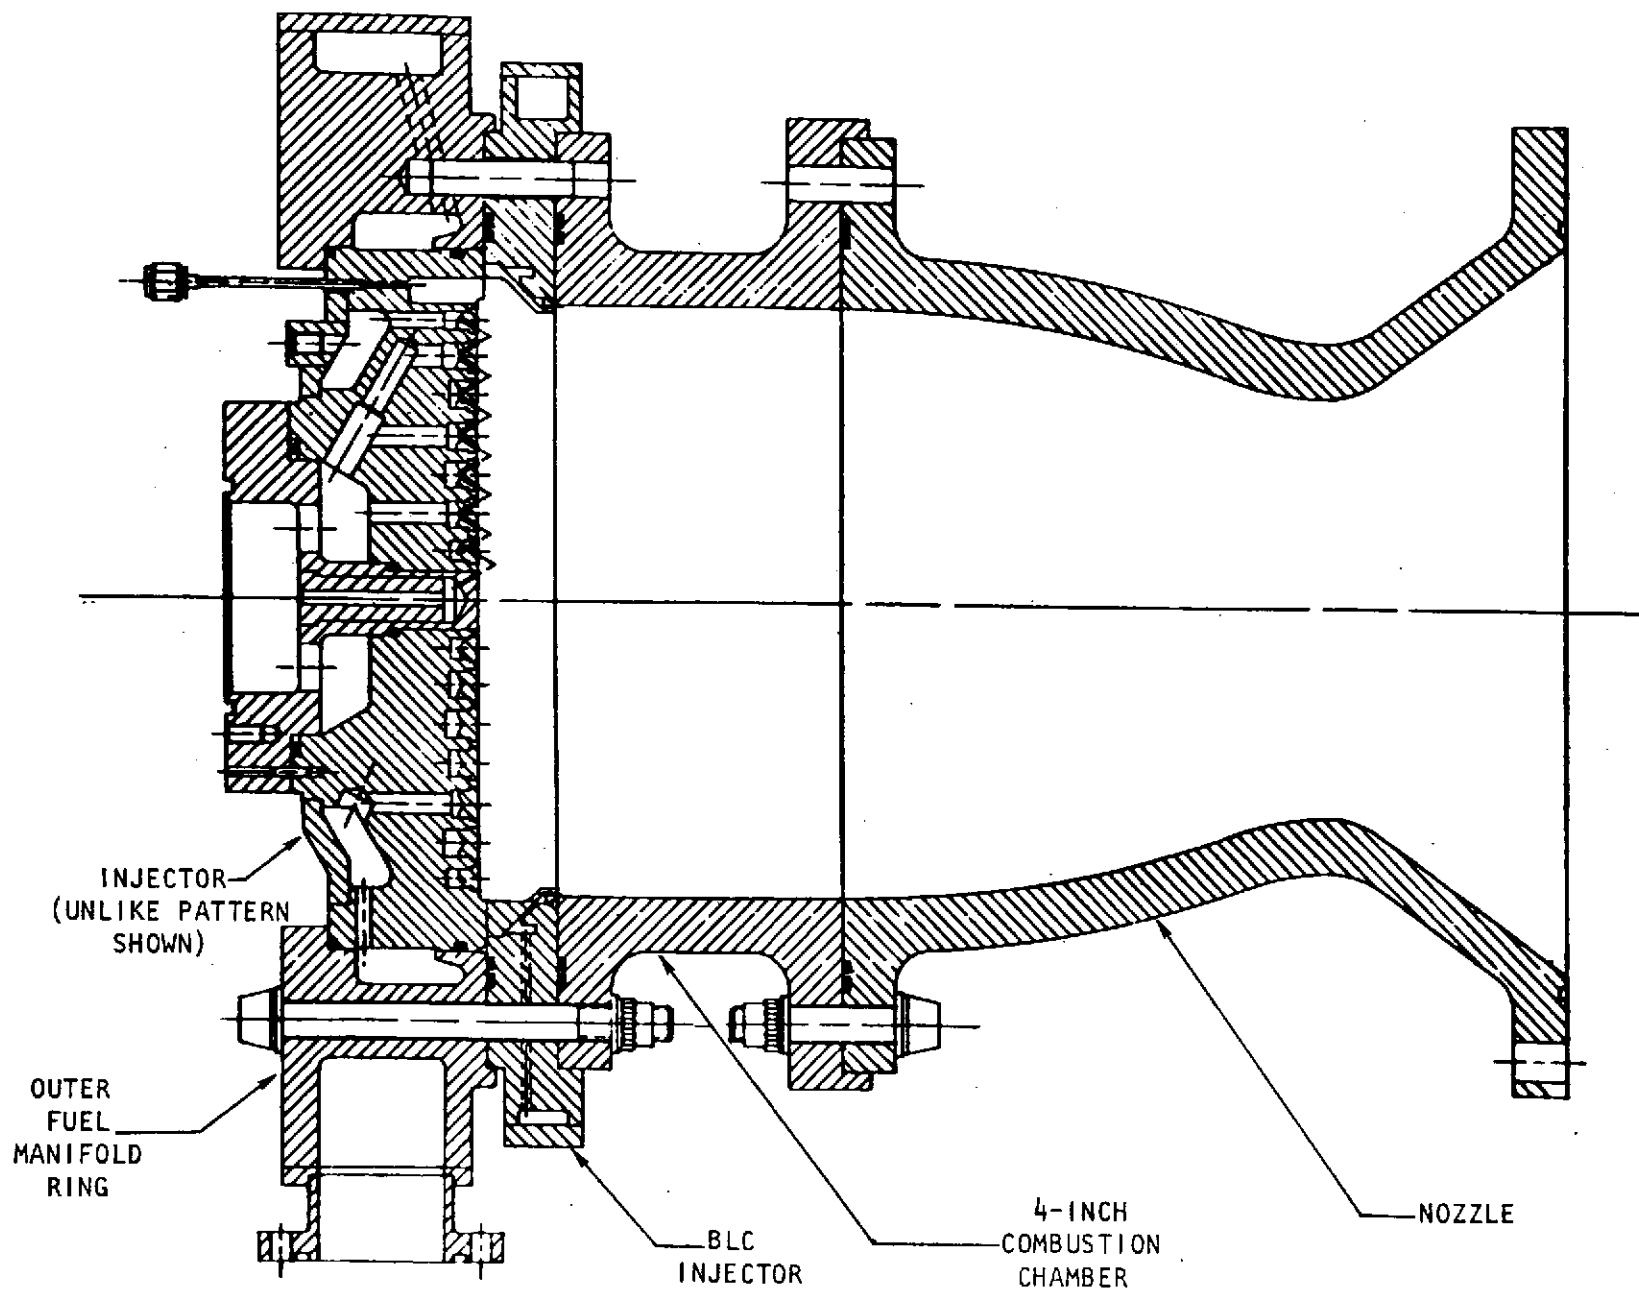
Thrust Chamber Assembly Used for Heated Fuel Acoustic Cavity Testing
